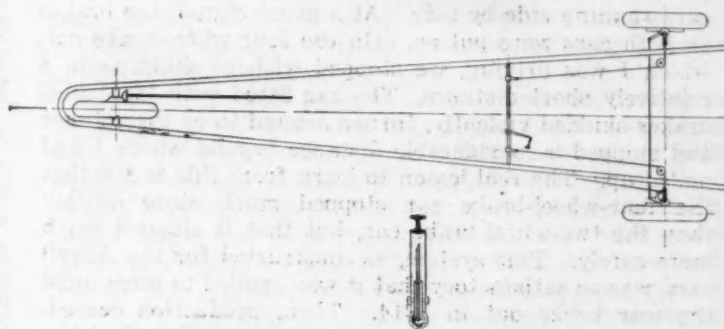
ORIGINAL FRONT-WHEEL BRAKES DESIGNED AND USED BY P. L. RENOUF IN ENGLAND
